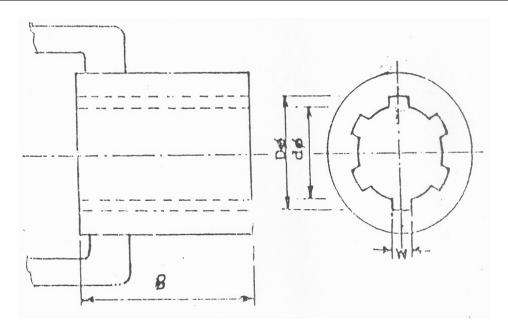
Propeller Shaft Insert Dimensions, (mm)
